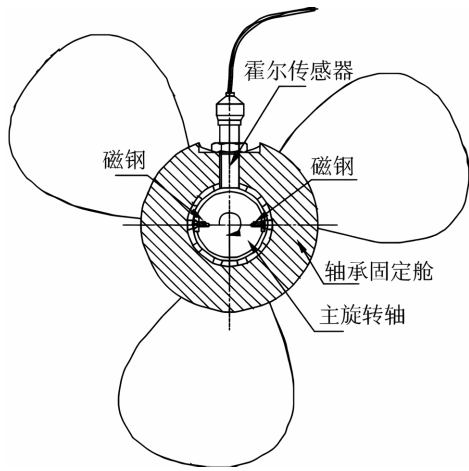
Linear Hall sensor bearing housing equipped with magnetic steel
